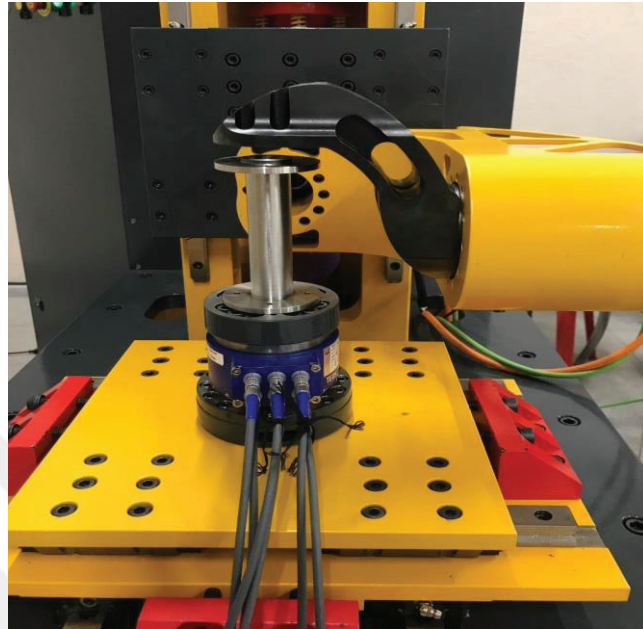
Representation of Aligning Fixture part X-Y Moving Table and 6-axis Loadcell.
